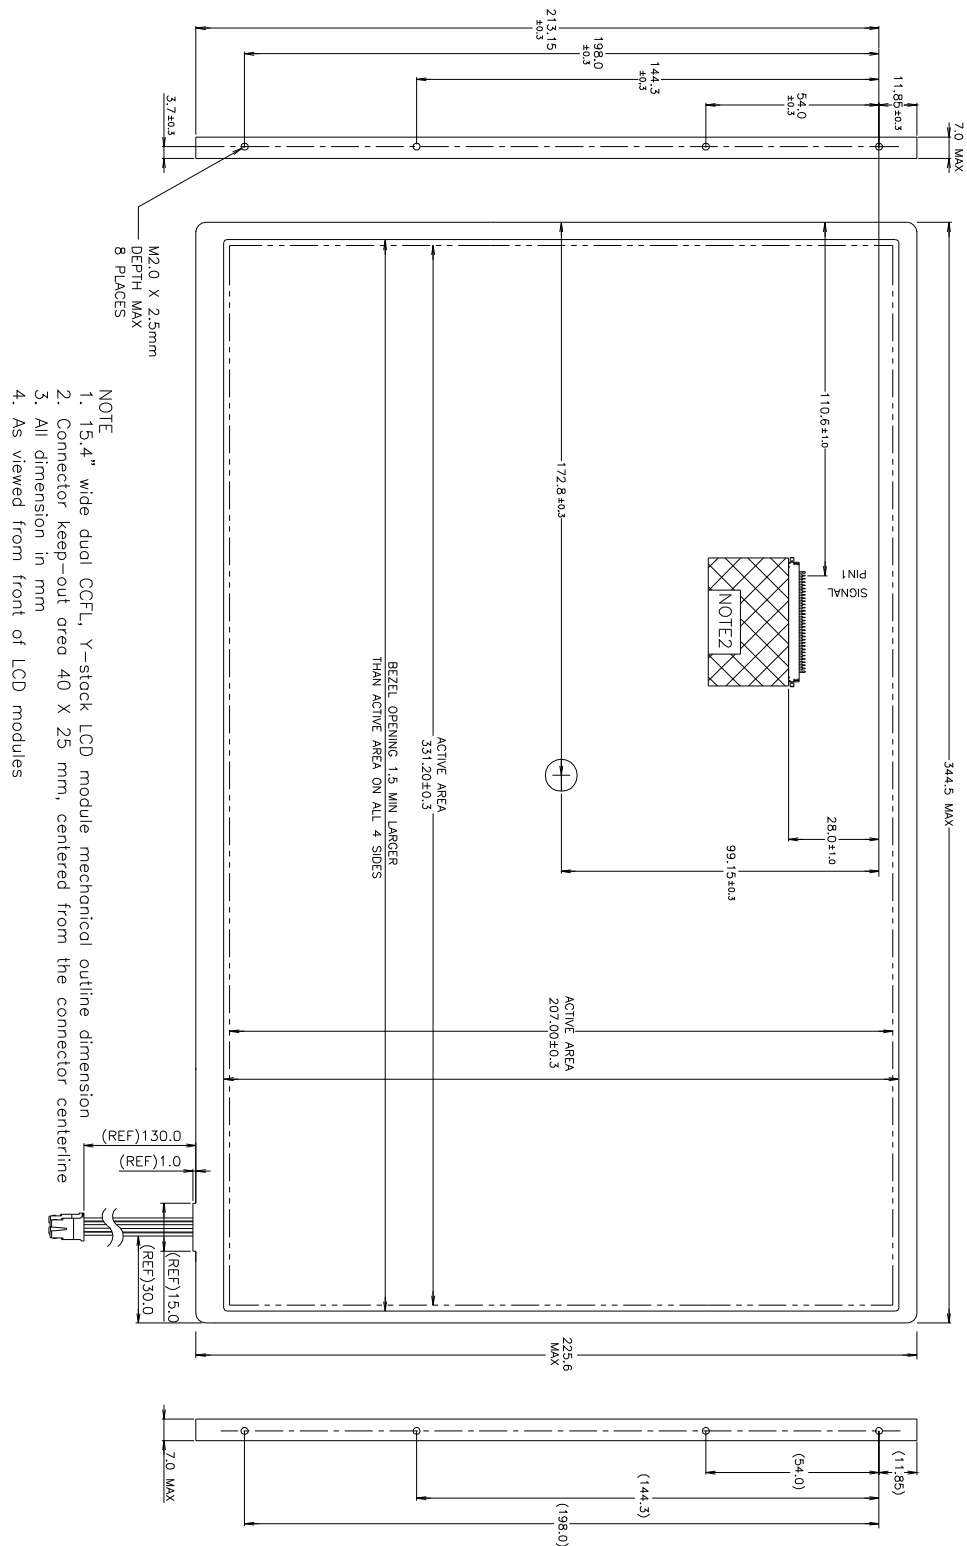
15.4-inch Wide Dual CCFL, Y-stack Mechanical Outline Dimension (Front View)
